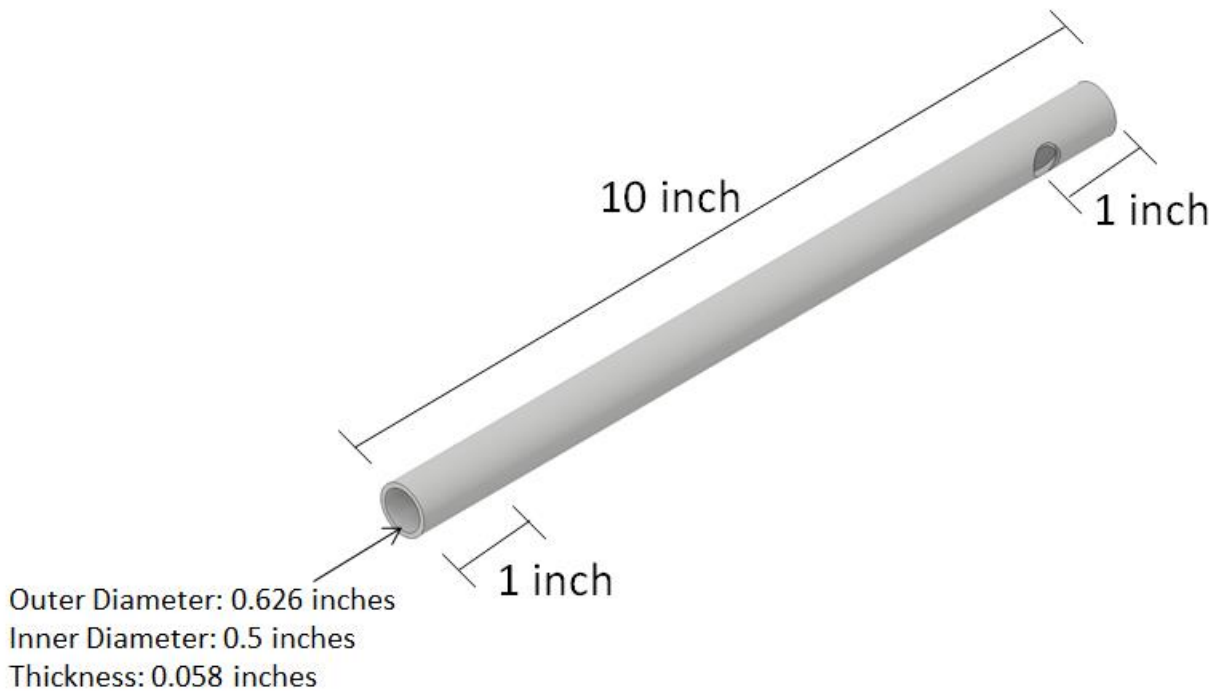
CAD drawing of the aperture tubing. See Appendix Figure 1 for detailed drawings.
